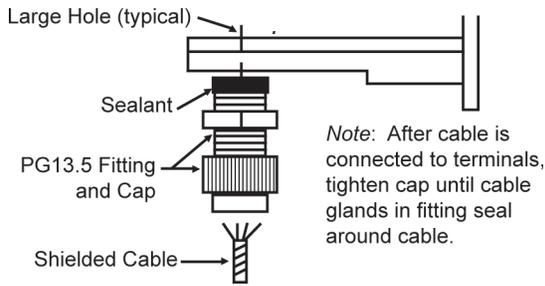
Inserting Shielded Interconnect Cable Through PG13.5 Fitting and Cap.
